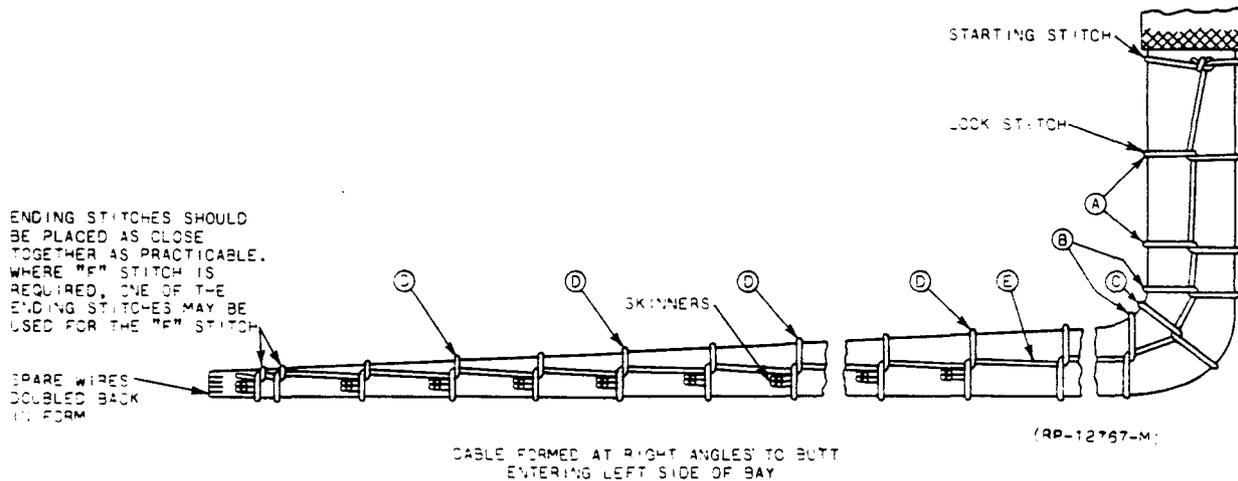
SEWING REQUIREMENTS FOR SEWED FORMS AND SUPERIMPOSED WIRING (PARS. 2.34, 3.25, 3.26, 3.31, 3.32)
